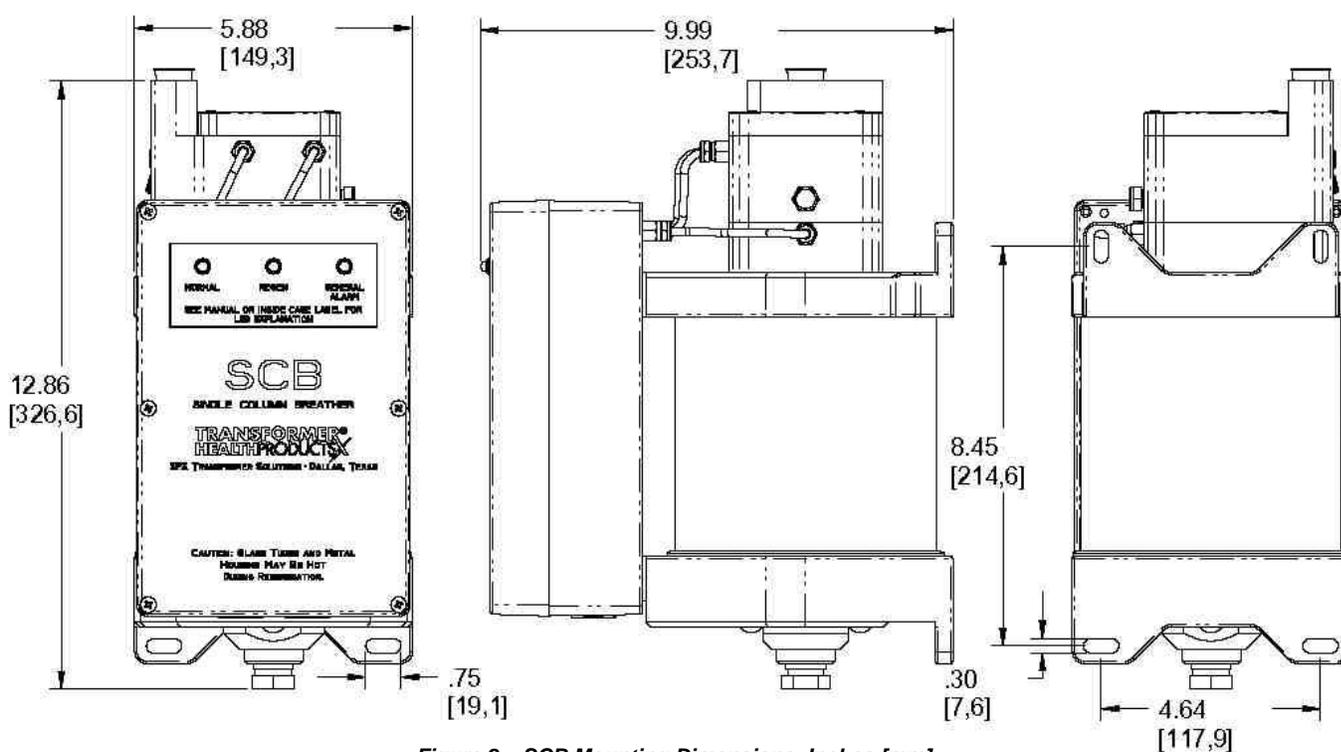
SCB Mounting Dimensions, Inches [mm]
